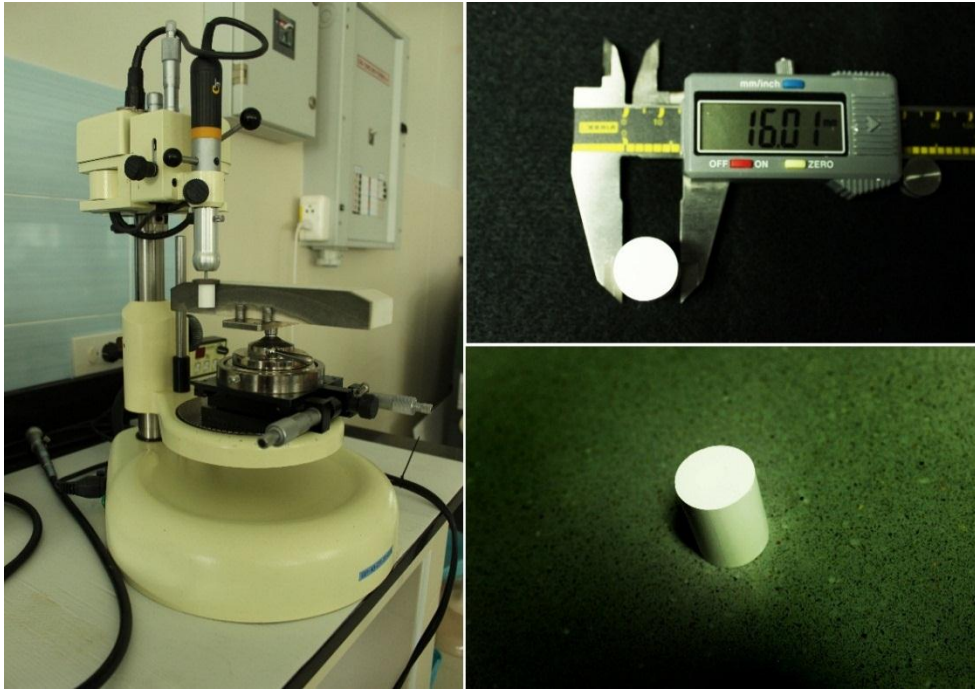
The zirconia block was trimmed into a cylindrical-shape using the 3D milling machine.
